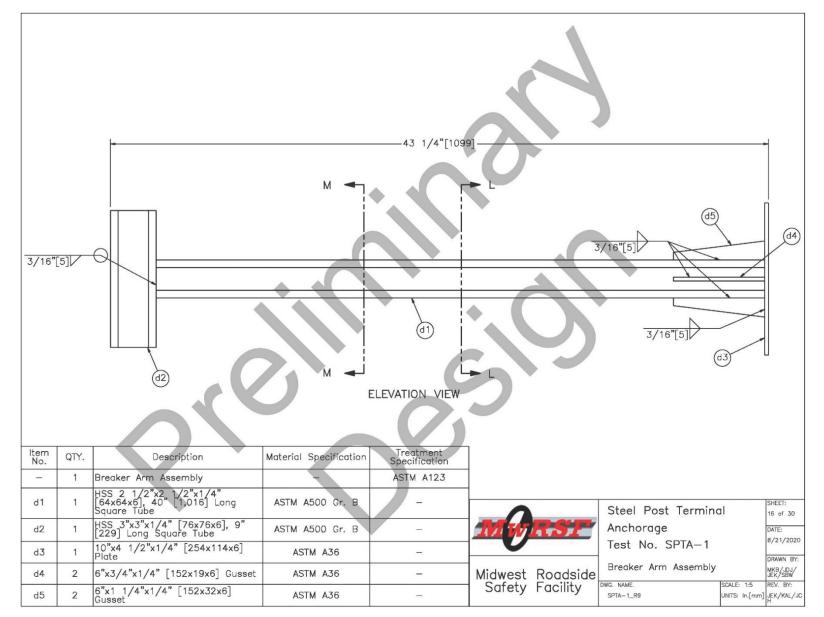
Breaker Arm Assembly, Test No. SPTA-1
